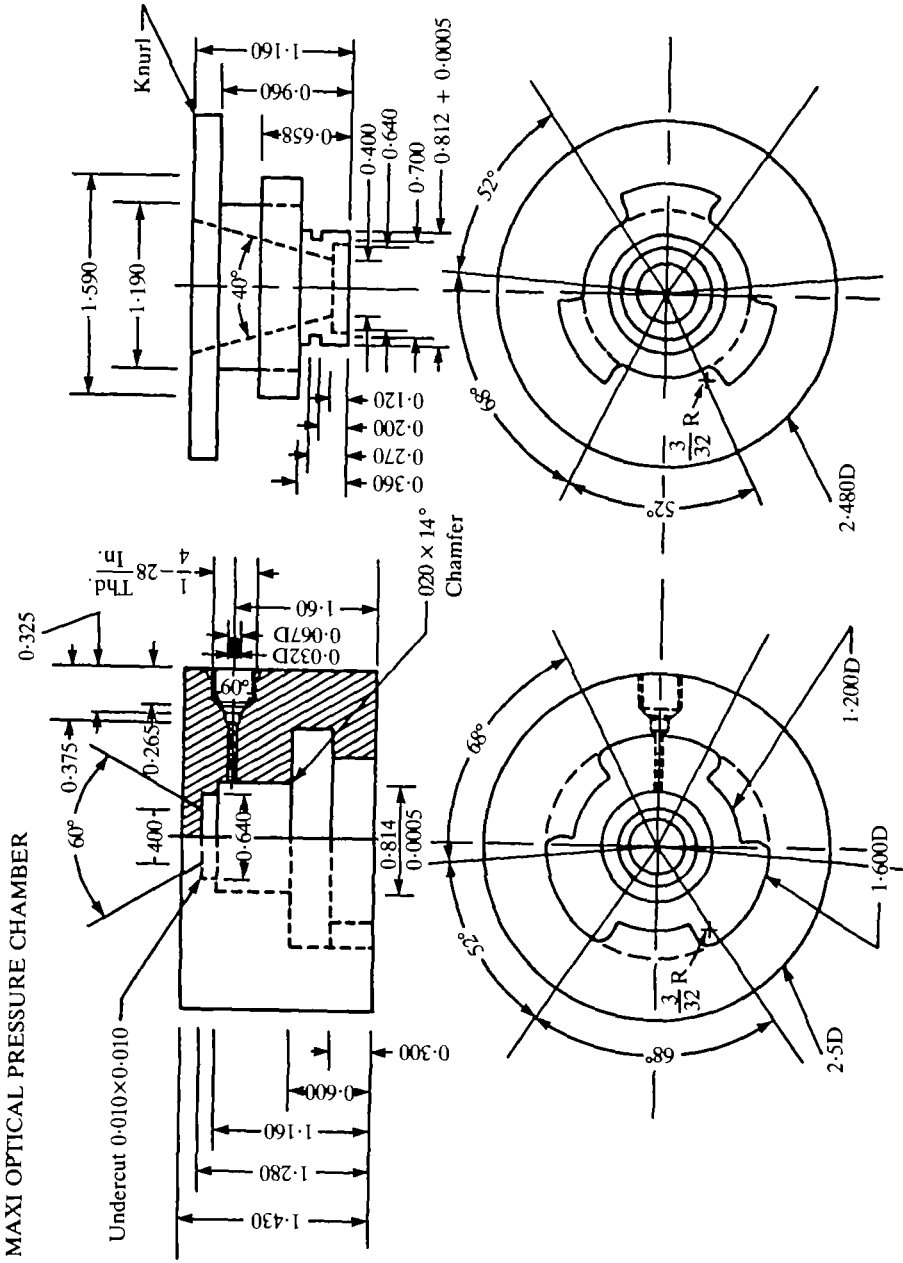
Detailed drawings of large microscope pressure chamber. The material is 316 stainless steel. All dimensions are  $\pm 0.001$  inches unless otherwise noted. All sharp corners are broken. All surfaces machine finished with no burrs. The window seats should be turned flat within 0.0002 inches. The windows are 3 mm-thick optical glass. Substituting sapphire windows for glass would increase the working pressure range to 1000 atm.
